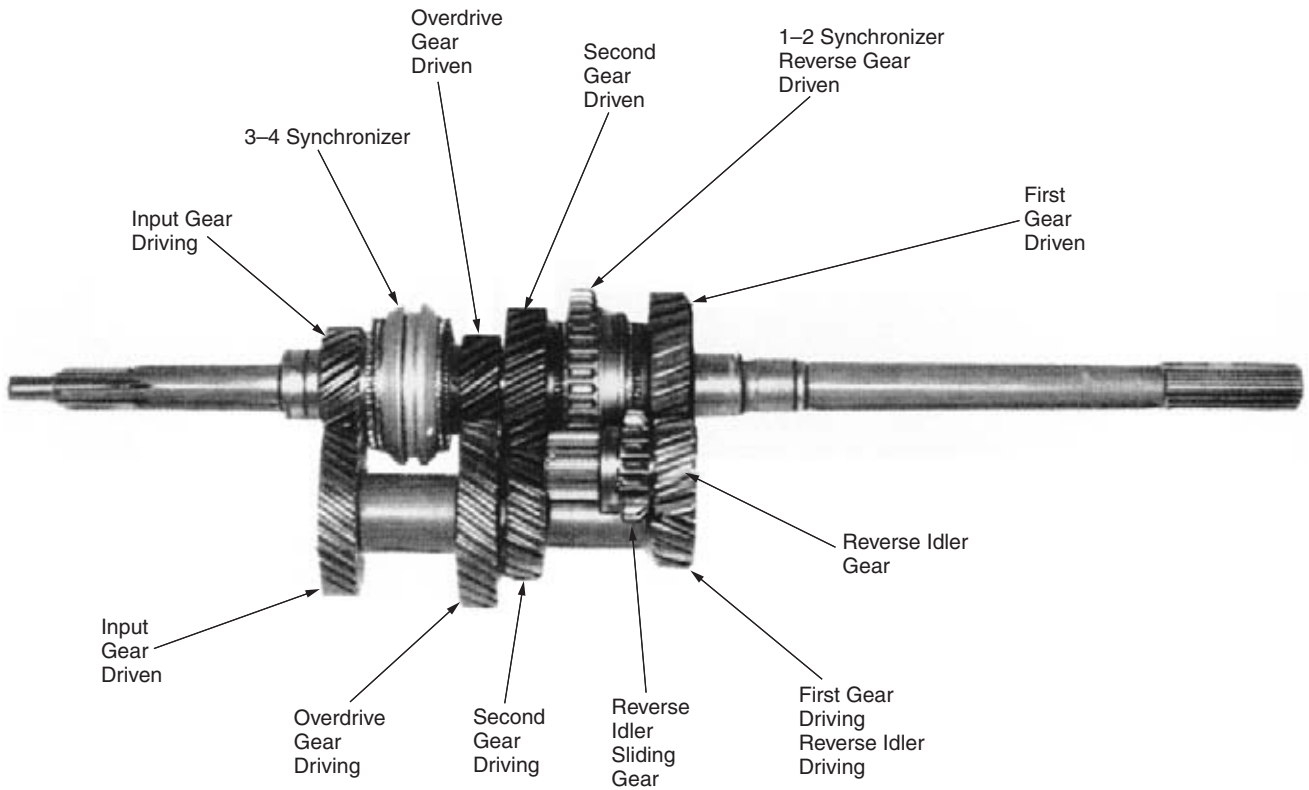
This four-speed transmission with an overdrive fourth gear. Note that the idler is shifted to engage reverse. (Courtesy of Ford Motor Company)
